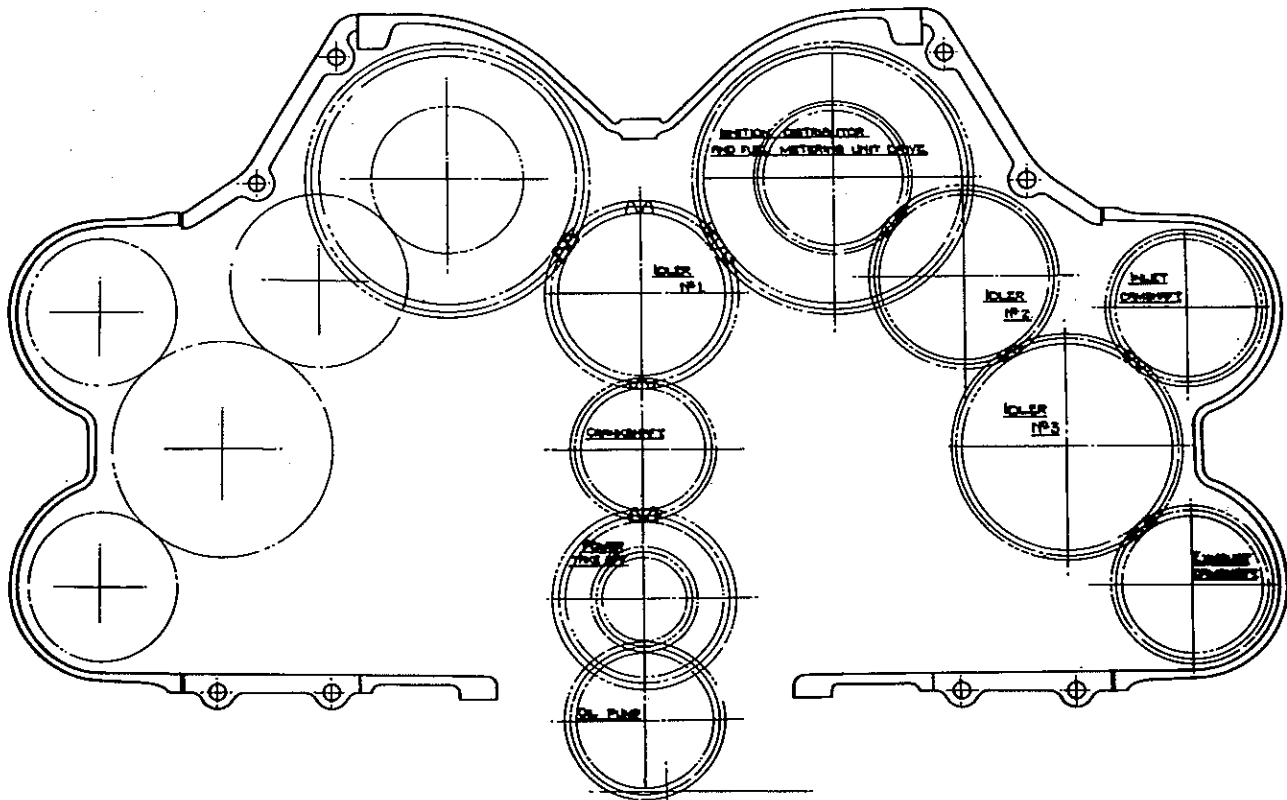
Arrangement of gear drive for 16 cyl engine
